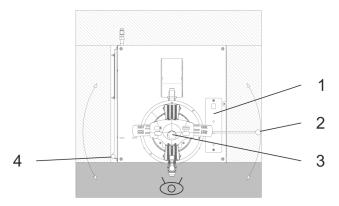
Danger zone of the machine, universal finisher with garment attachment
